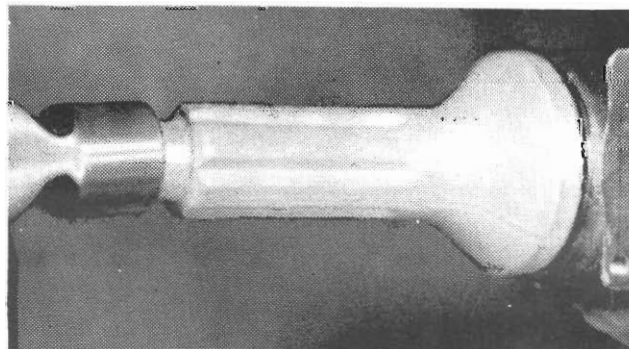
Installing pinion oil seal (Tool E3C10L)
